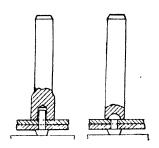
SET-UP AND RIVET-ING TOOLS
